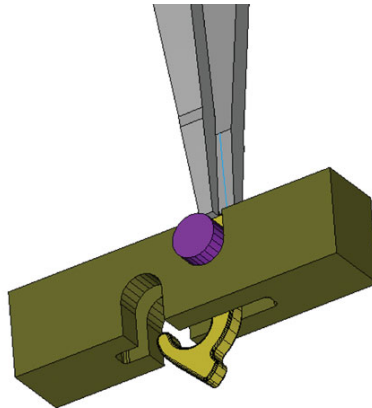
SLIDE THE LOAD BOARD SIDE OF THE CONTACT OVER THE LOAD BOARD SIDE ELASTOMER USING A NON-METALLIC TWEEZERS.
